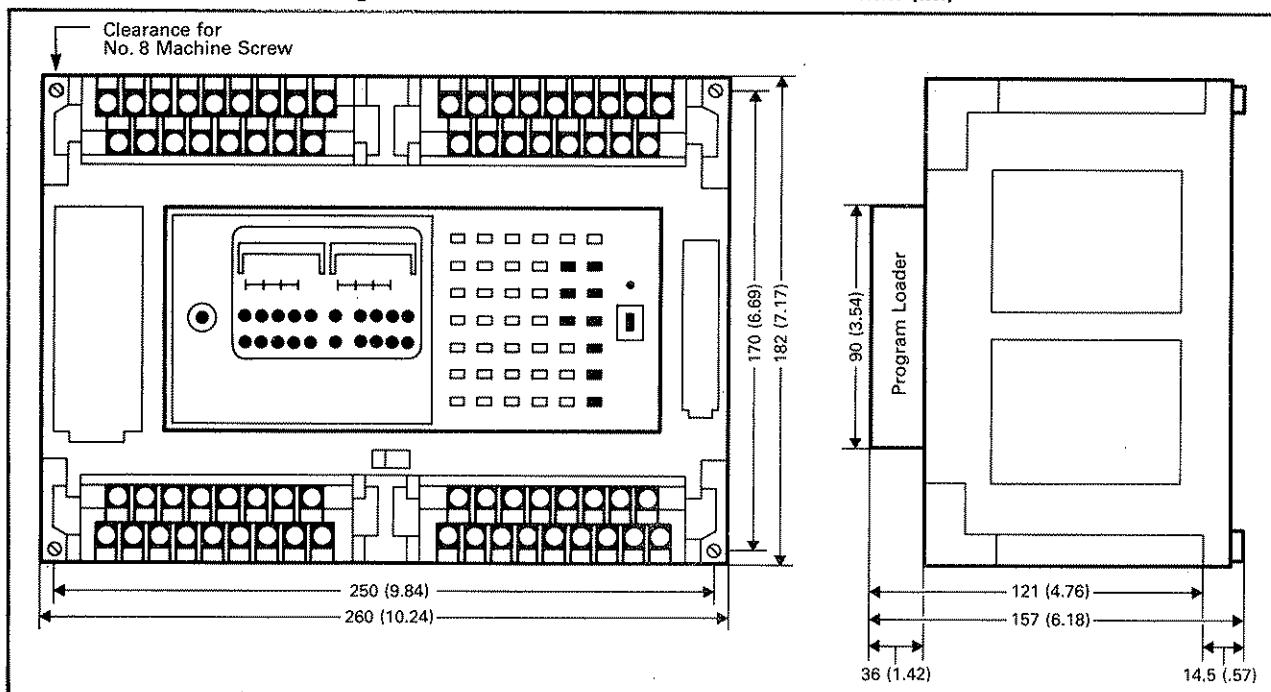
External Dimensions for PCE-111 in mm (in.)
